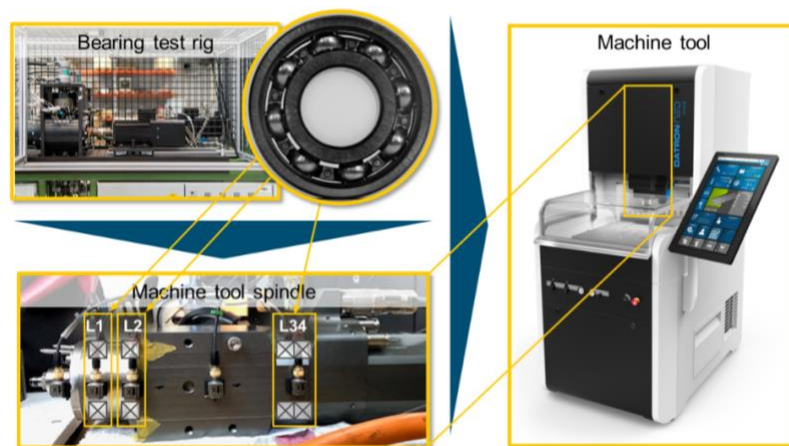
Illustration of the experimental test series. Tests in the bearing test rig were followed by free running tests of the machine tool spindle and chipping test in a machine tool.
